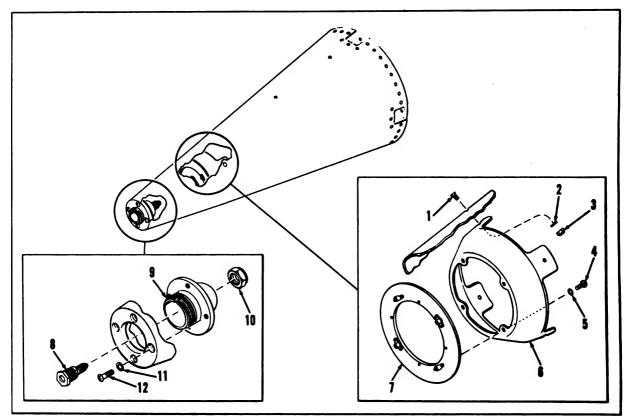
NOSE ASSEMBLY, GUIDED MISSILE /9028024/ /SEE FIGURE 43 FOR NEXT HIGHER ASSEMBLY
